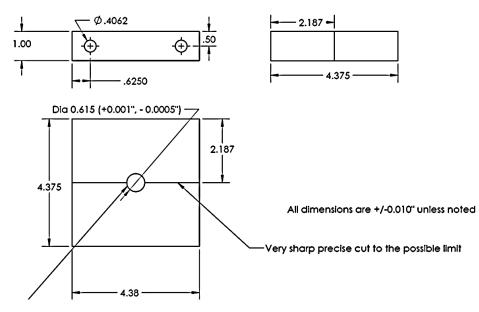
Model dimension (in inches) of Pile 2 head mass.
